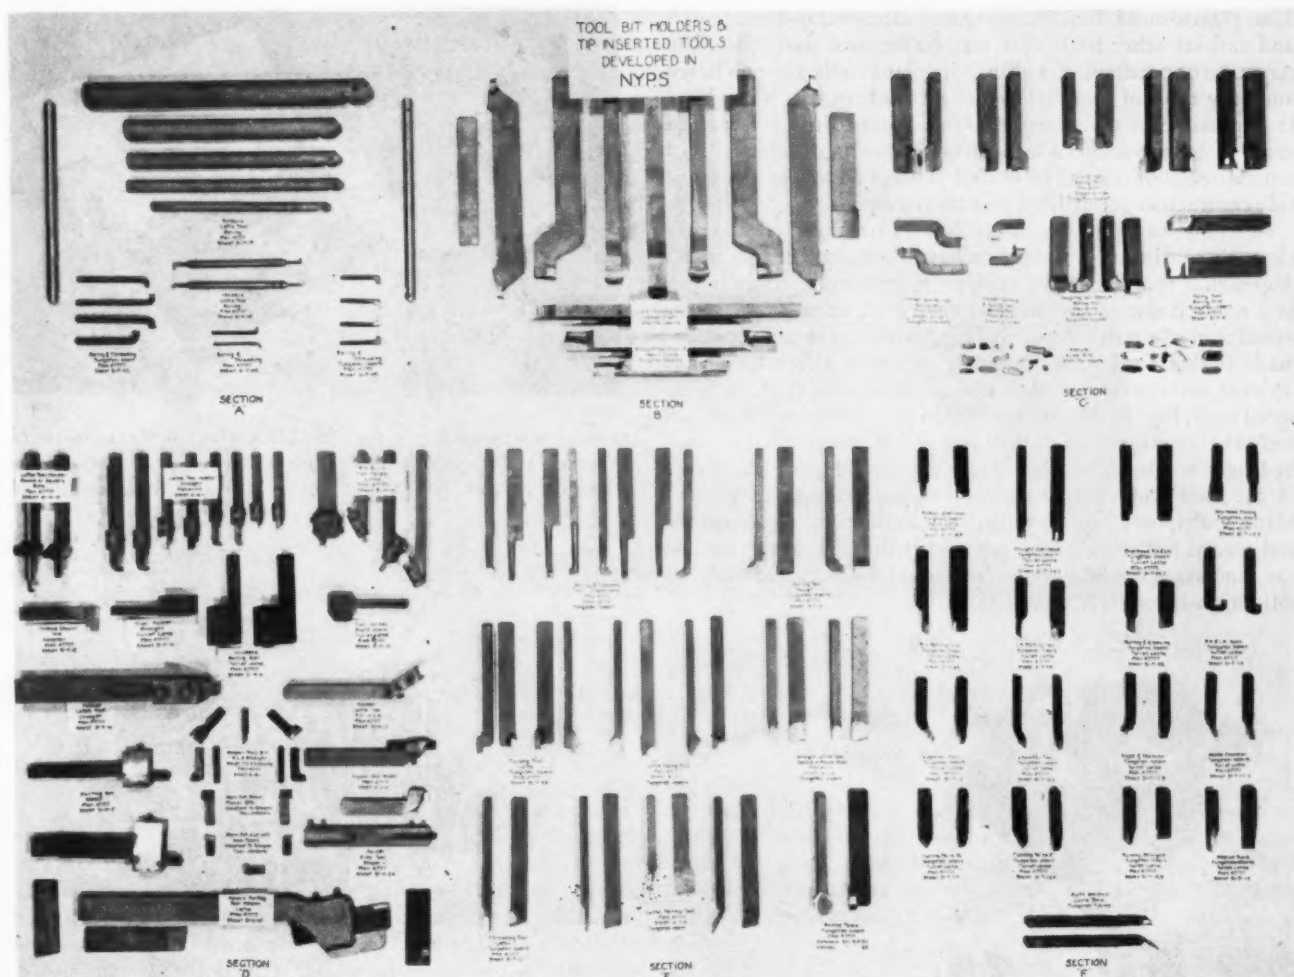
TIPPED CUTTING TOOLS AND HOLDERS AS DEVELOPED AT THE PUGET SOUND NAVY YARD
